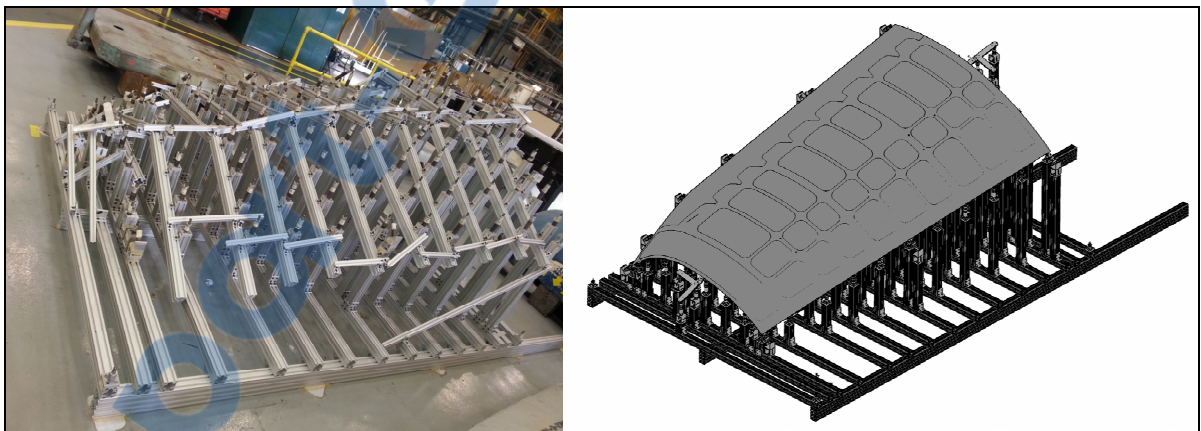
A special, expensive, heavy, and complex fixture for the inspection of a flexible plate, Bombardier Aerospace Inc., *left*: the fixture without the part, *right*: the CAD model of the fixture with the part set up on it
